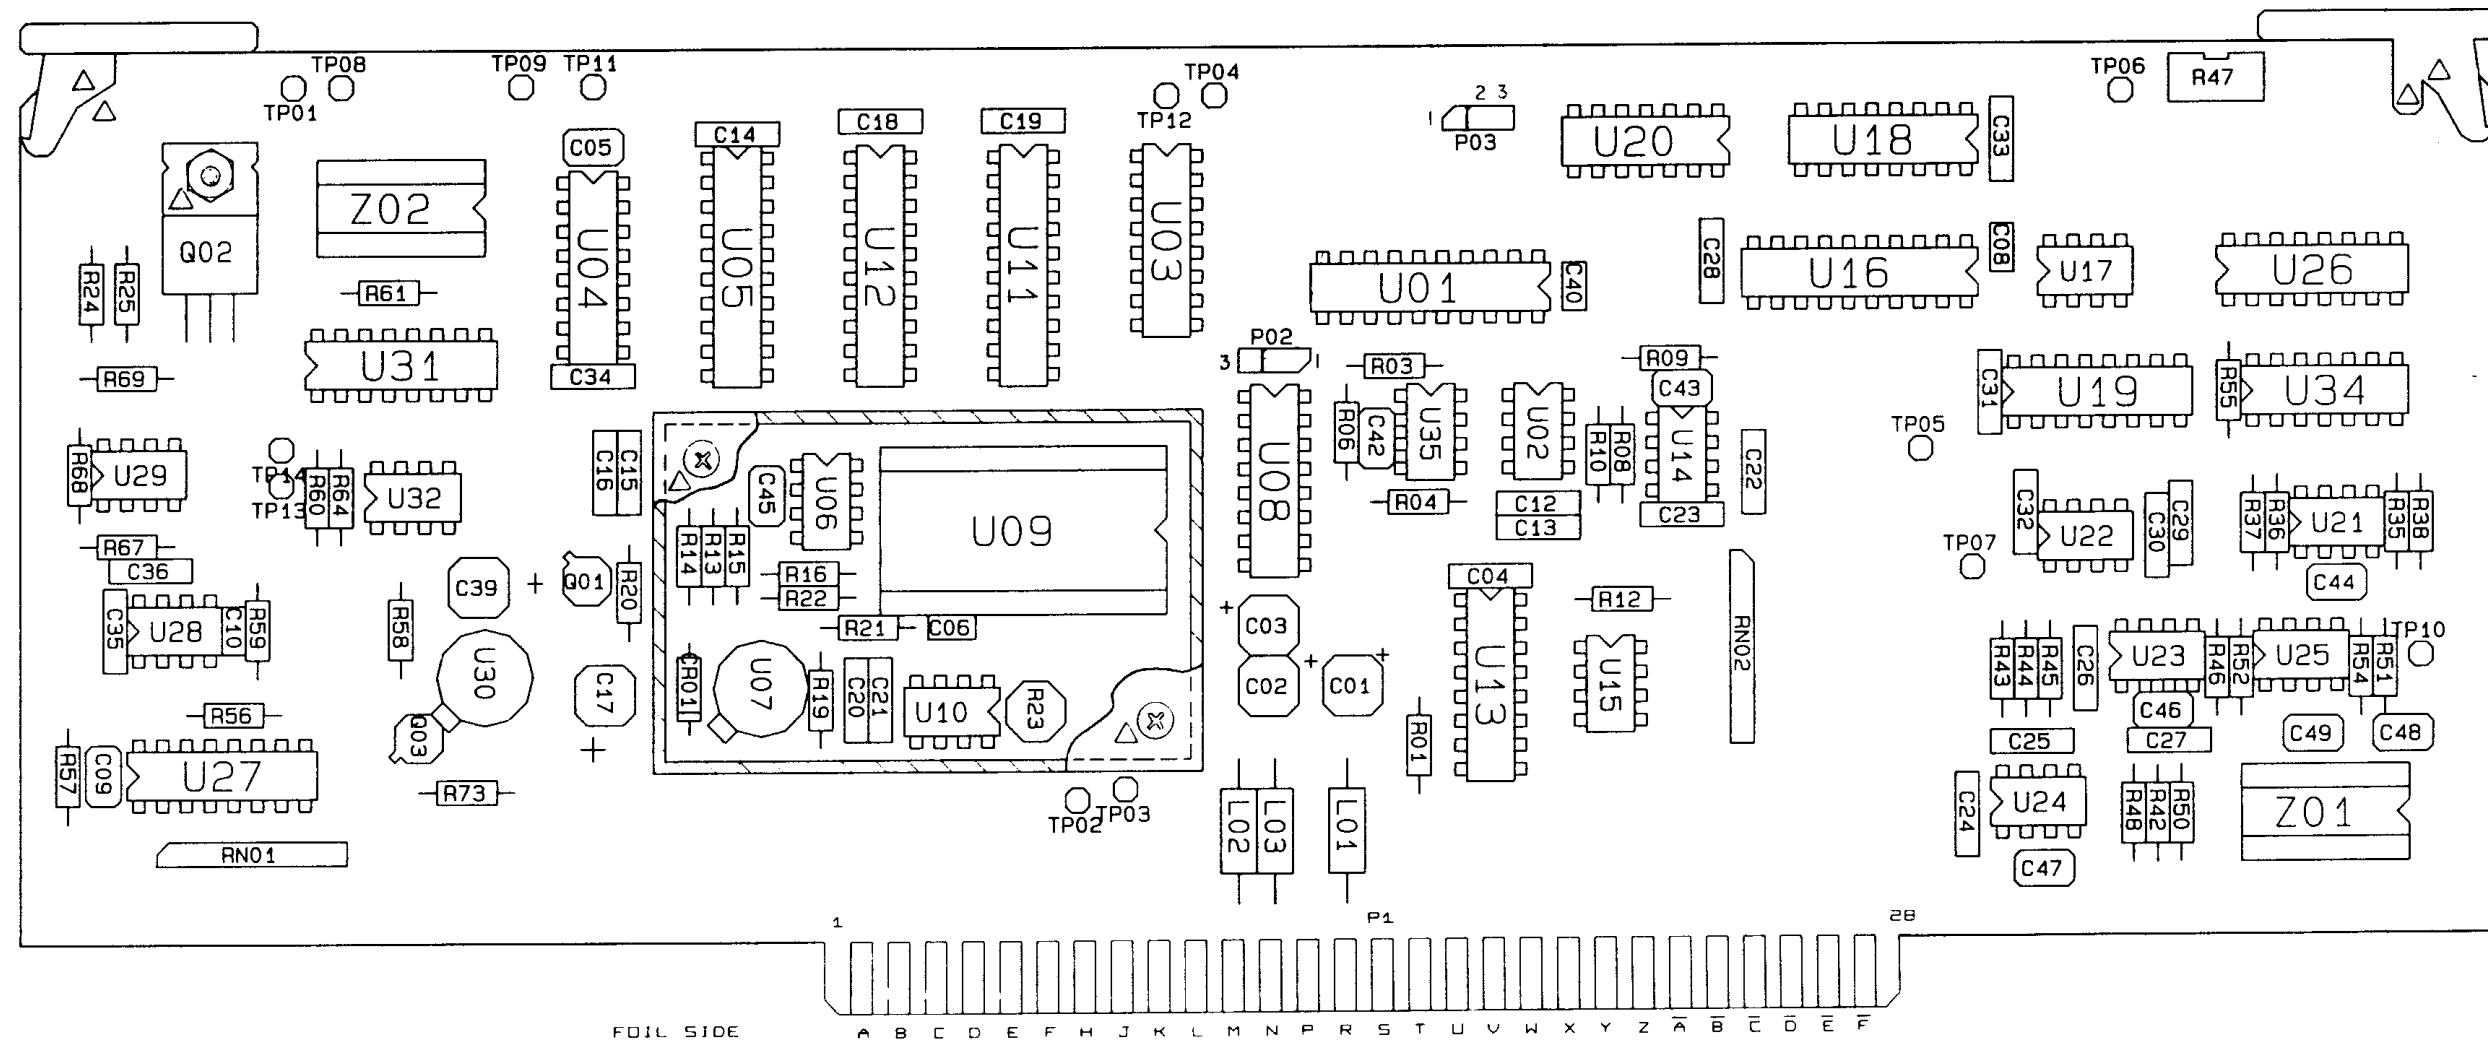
A1A5 Frequency Instruction PCB Parts Locator Diagram, Assy
